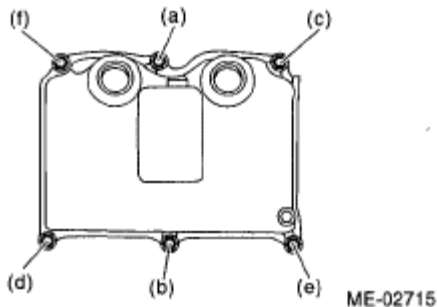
Tightening Sequence Of Rocker Cover Bolts - RH Side
